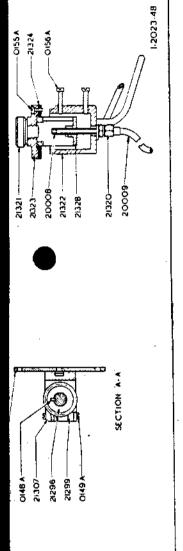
COMPLETE SHUTTER SHAFT AND OIL FILTER
